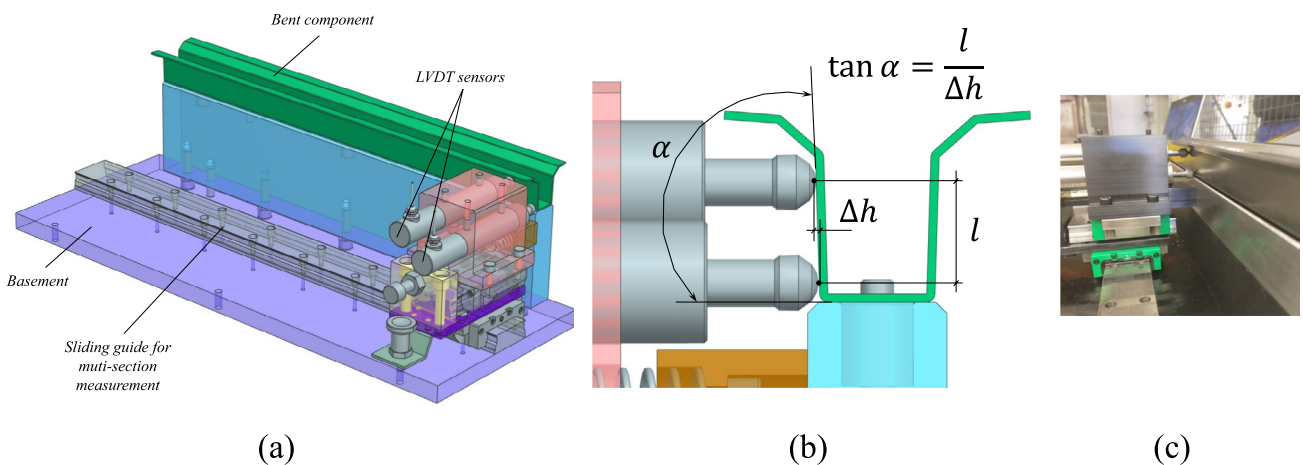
Measuring tool for angle measurement. (a) CAD design, (b) schematic for angle calculation and (c) real tool
